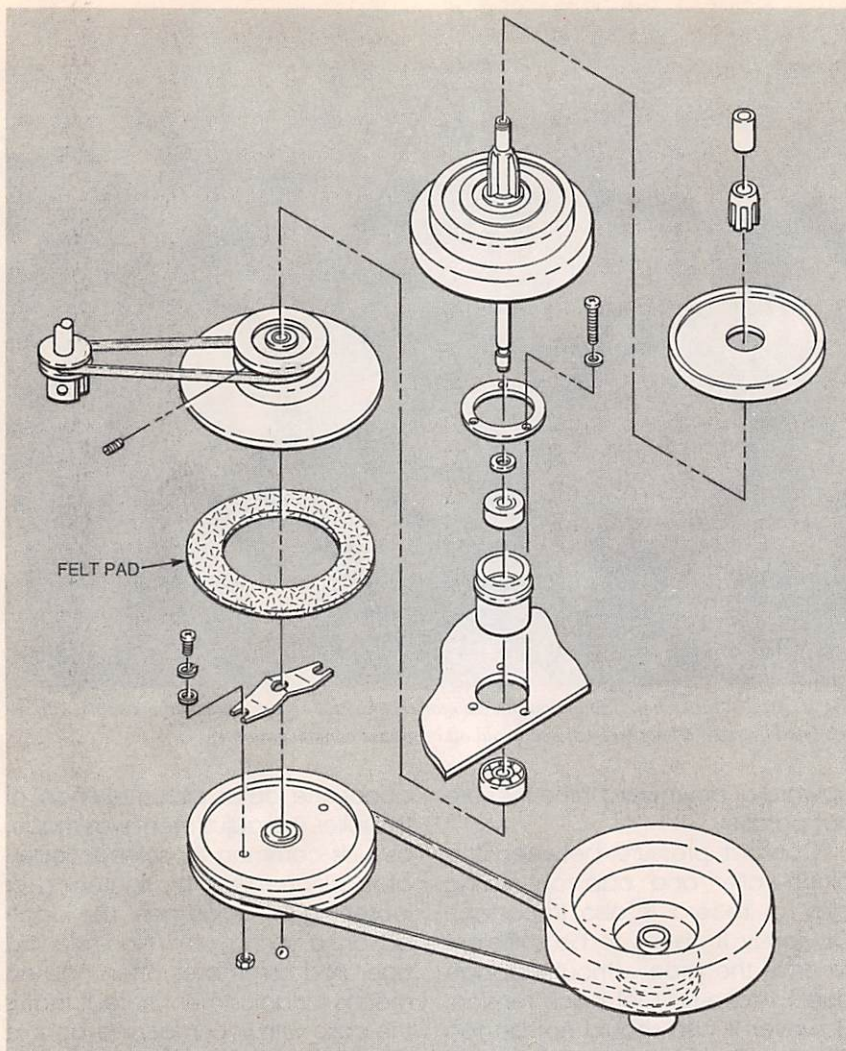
A typical take-up turntable-clutch assembly from a single-motor recorder. The felt pad is used as a "slip clutch," transferring rotational force on an as-needed basis to ensure smooth winding of tape onto the take-up reel. Great care must be used to avoid oil or grease contamination of either the felt or its mating surface.
